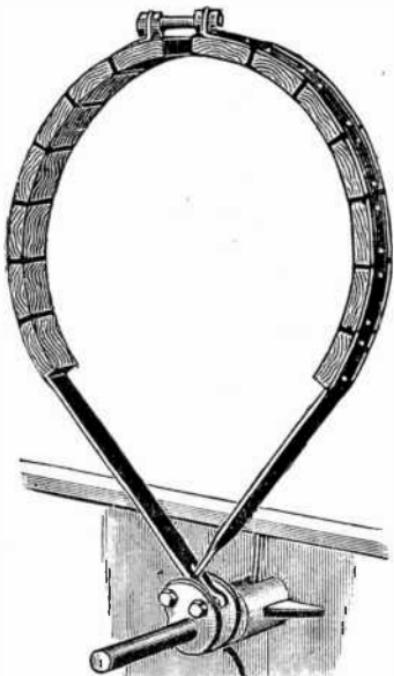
,864.—Band brake for holding the drum with load when disengaged from the friction. The metal band lined with hardwood segments tightly embraces the circumference of the drum when the brake lever is pressed down.
